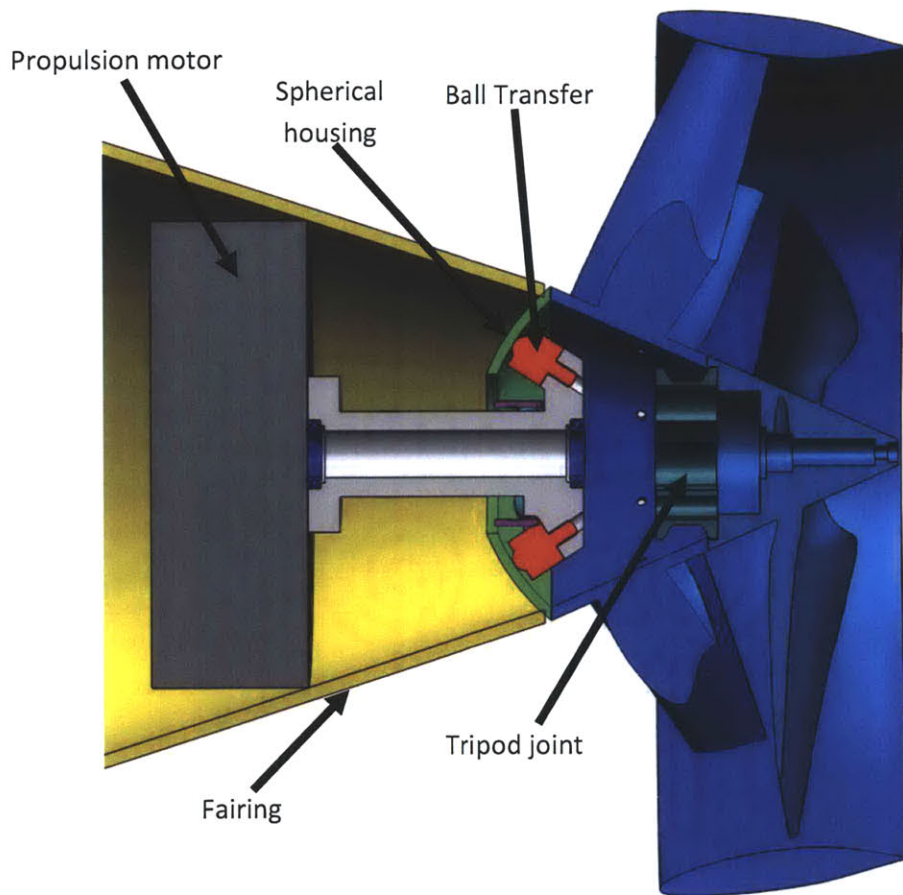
A cross-sectional side view of the spherical floating pivot design. Note that the propulsion motor limits the minimum length of the assembly. A smaller diameter motor shortens the entire system.
